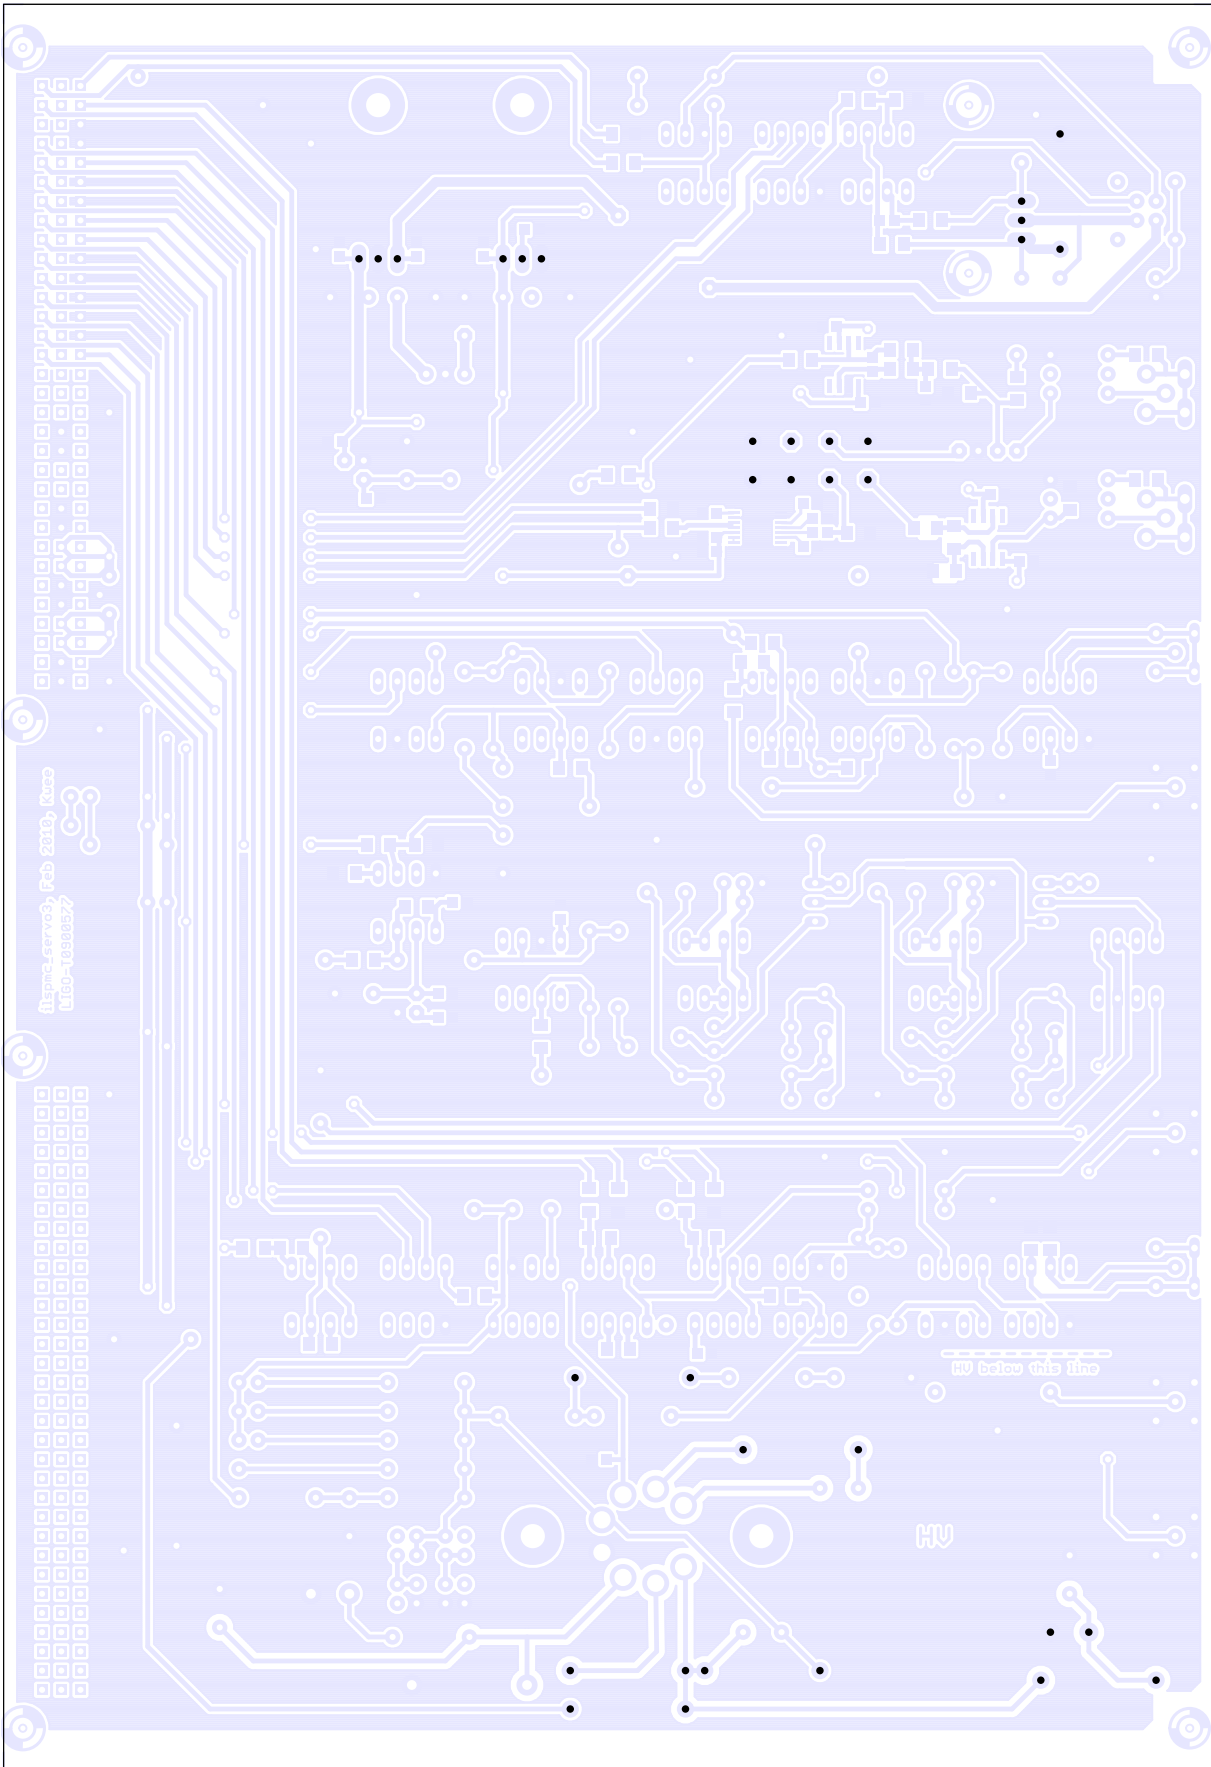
Board bottom view showing connectors, test points, vias and wired components
